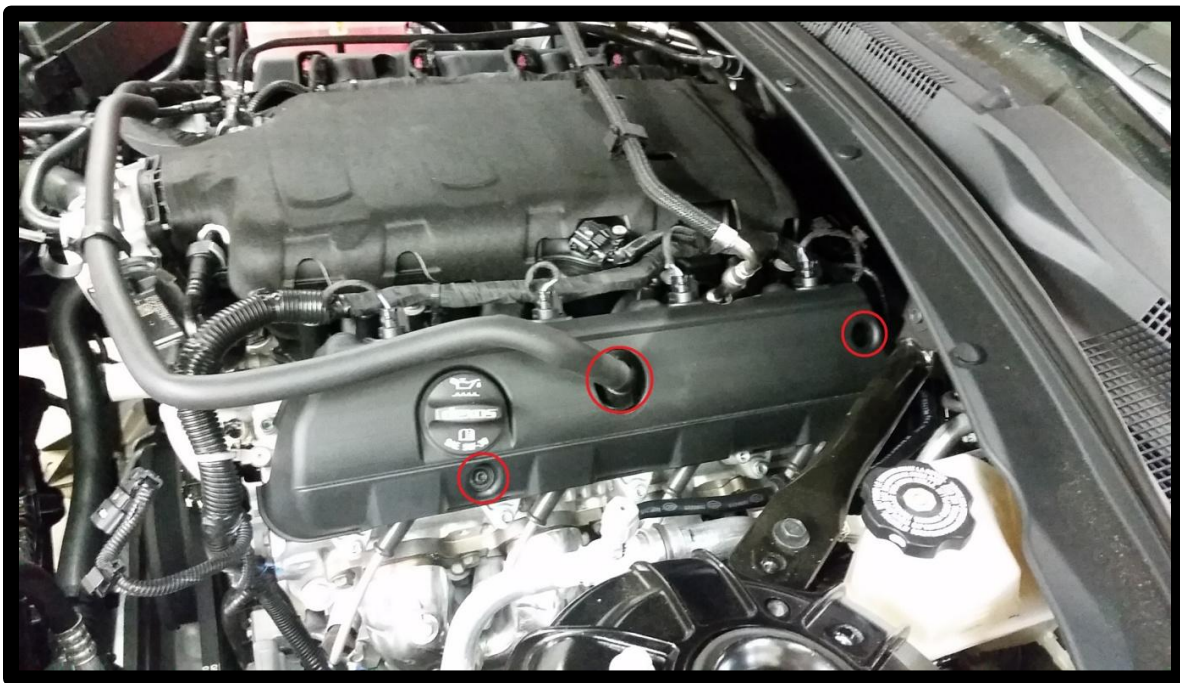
Removing Coil Pack Covers (Driver Side Shown)
